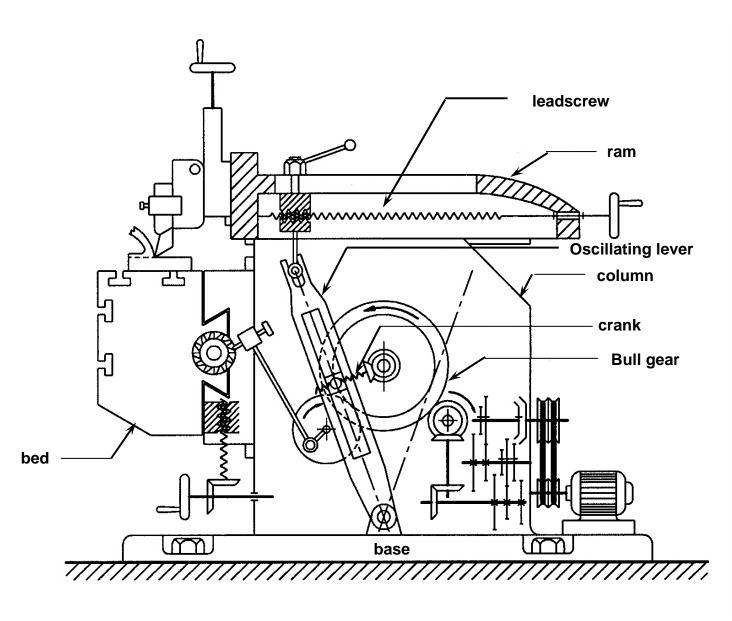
Kinematic diagram of a shaping machine.
